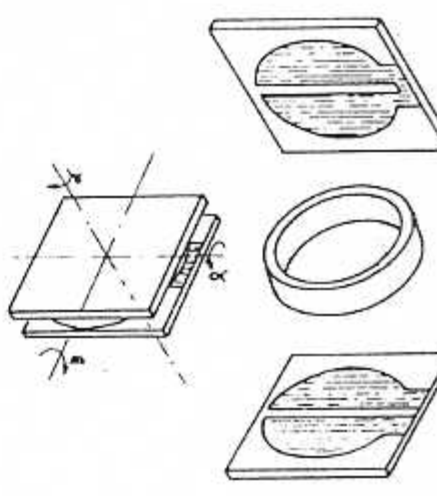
THE INCLINOMETER SENSING CELL IN ITS PARTS (TOP) AND ASSEMBLY (BOTTOM)
